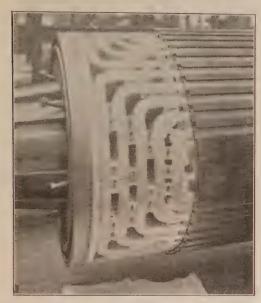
View of End of Rotor of a 35,300-Kv-a. 1500 Rev. per Min. Steam Turbine Generator Rotor
